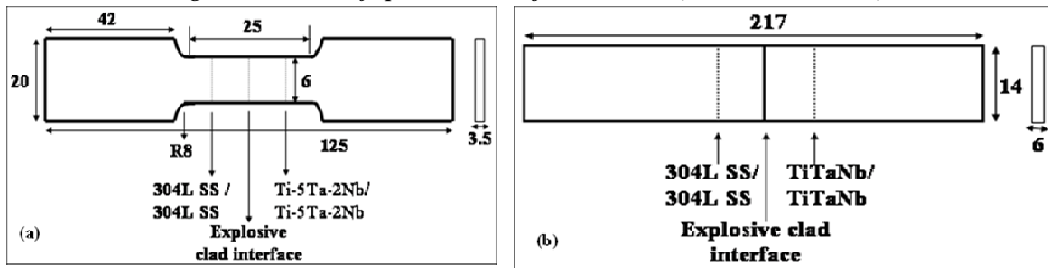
Schematic of specimens used for (a) tensile and (b) bend tests in transverse direction (dimensions in mm)
